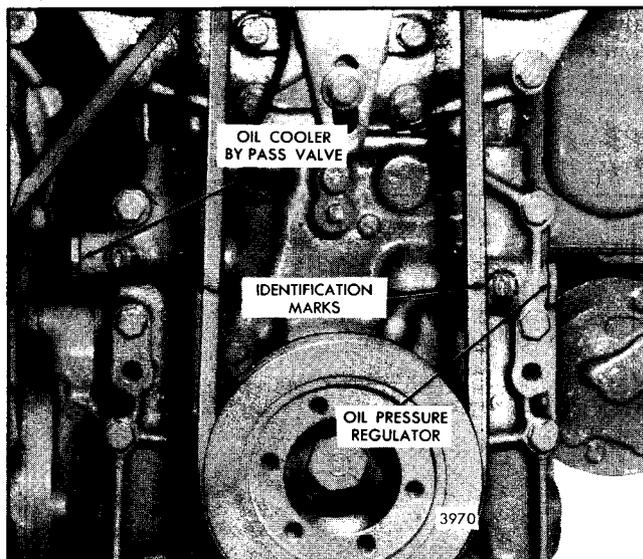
Location of Current Oil Pressure Regulator Valve (In-line Engine)
